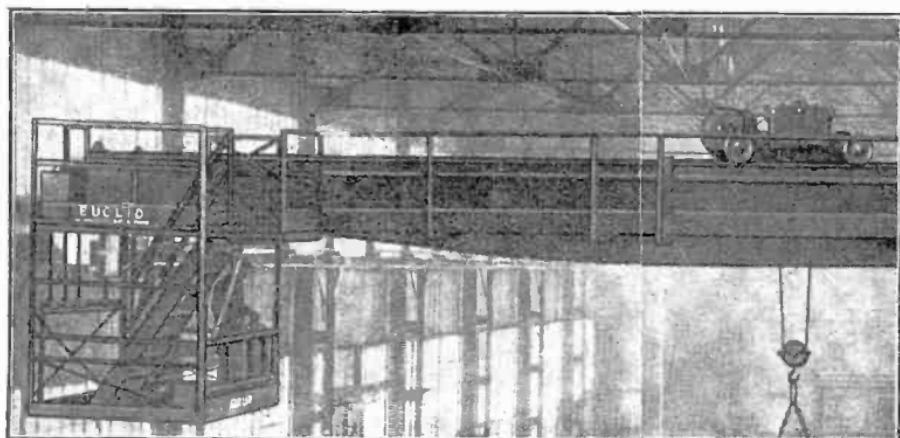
,883.—*Euclid crane construction 10.* *Box girder type crane having moderate duty trolleys in place of the mill type trolley.* The trolley is shown in detail in figs. 6,884 and 6,885.
